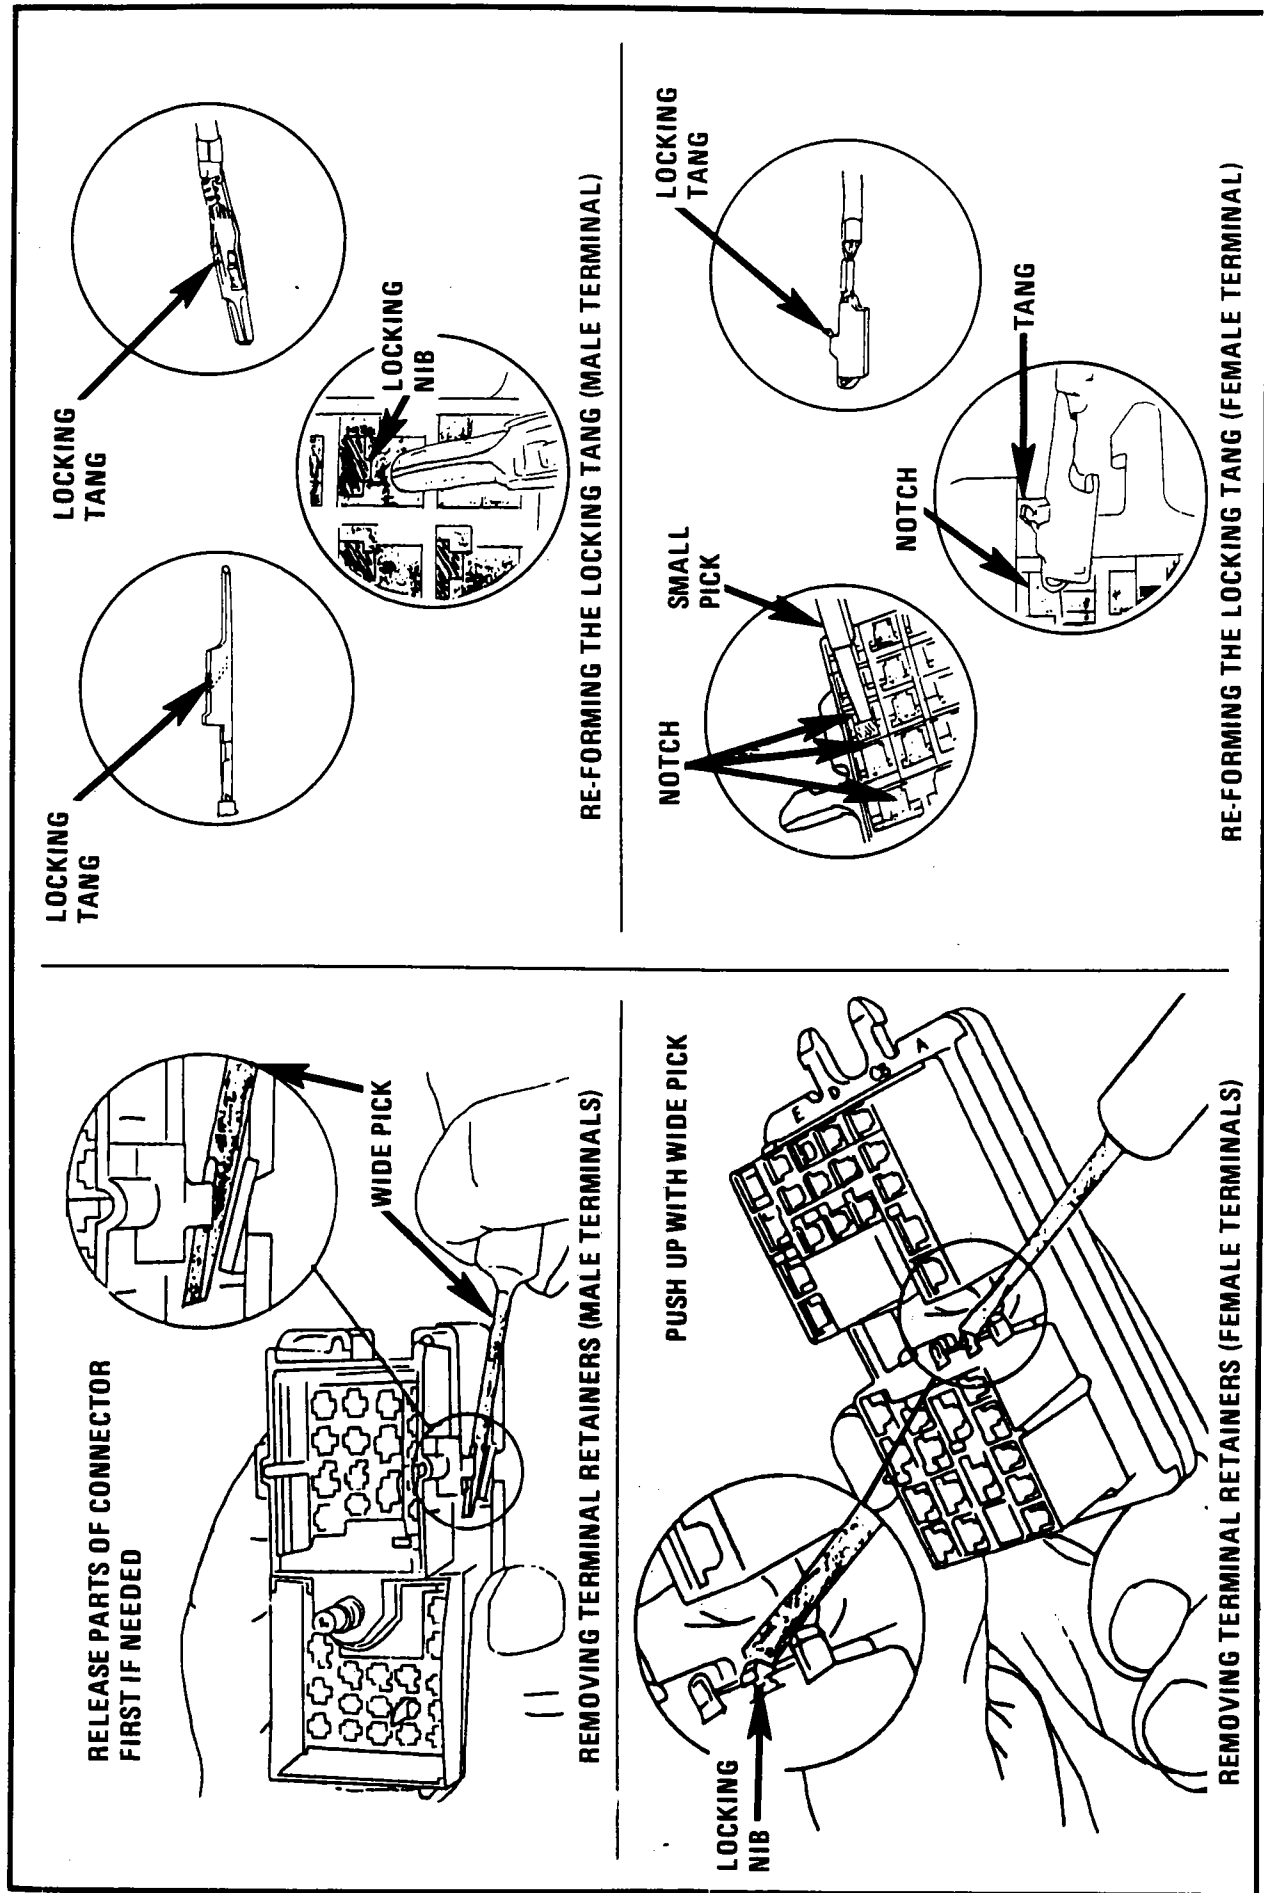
Metri-pack Type Connectors - Push-To-Seat Type
